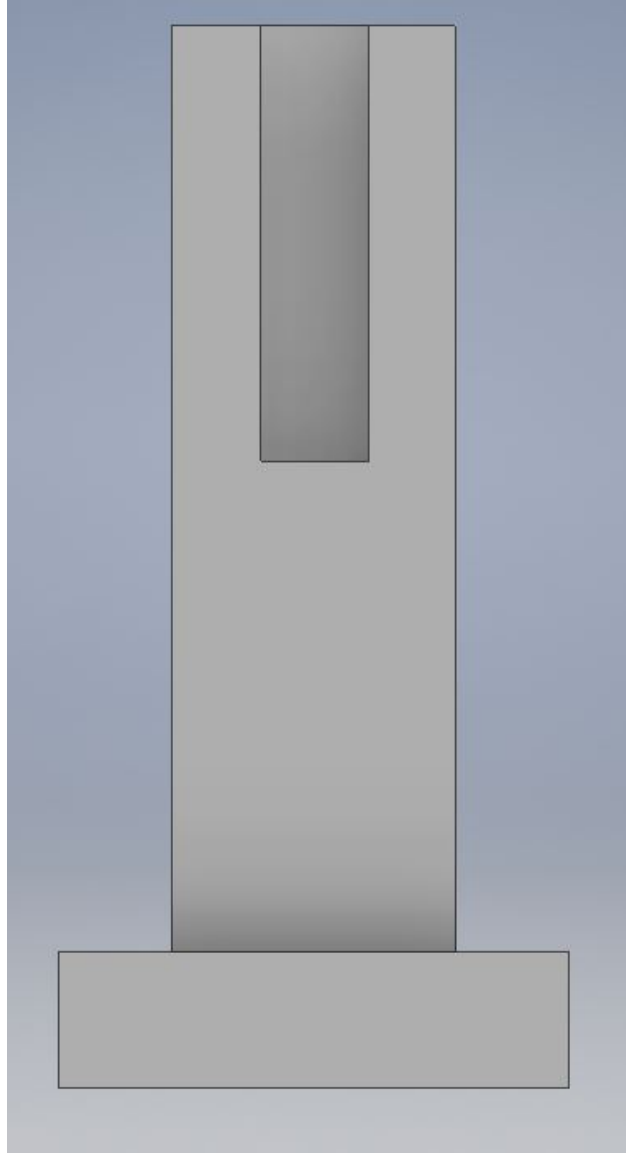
Side view of printed holder system's bottom section. The larger section provides weight to the system and prevents tipping during testing processes.
